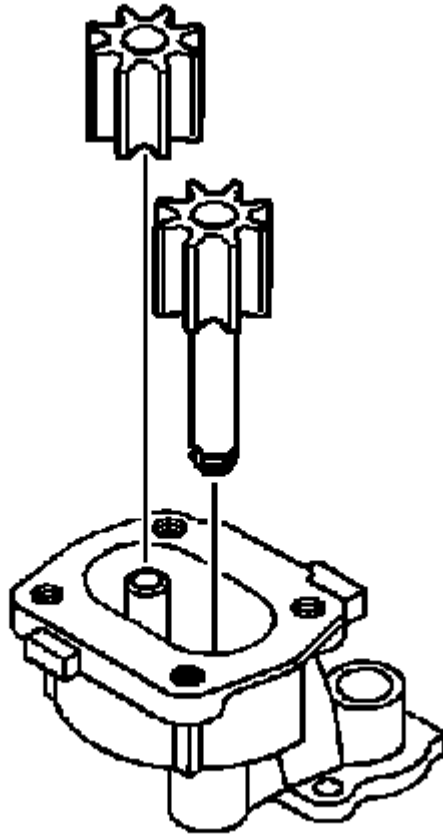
View Of Oil Pump Drive Gear & Driven Gear
